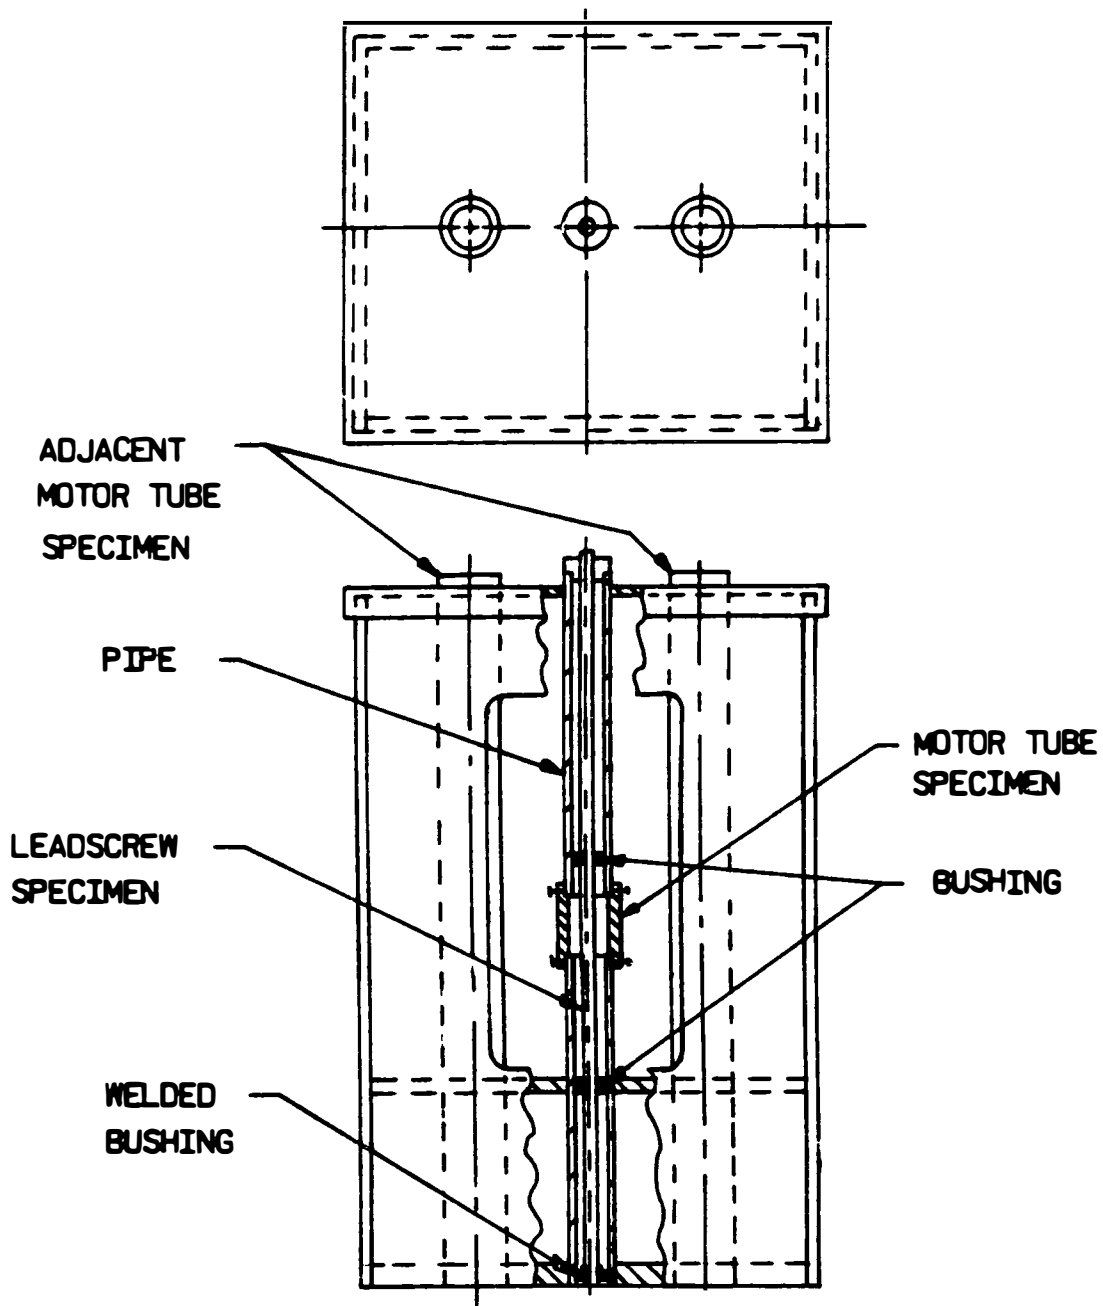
MOTOR TUBE/LEADSCREW CUTTING MOCKUP
